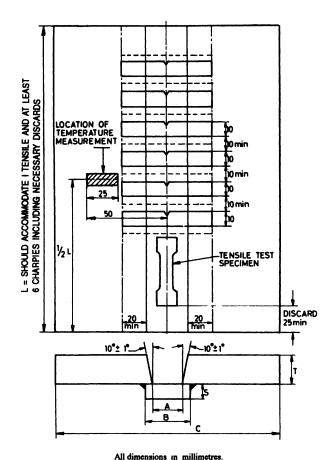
Dimensions of Test Assembly and Position of Cutting Test Pieces
